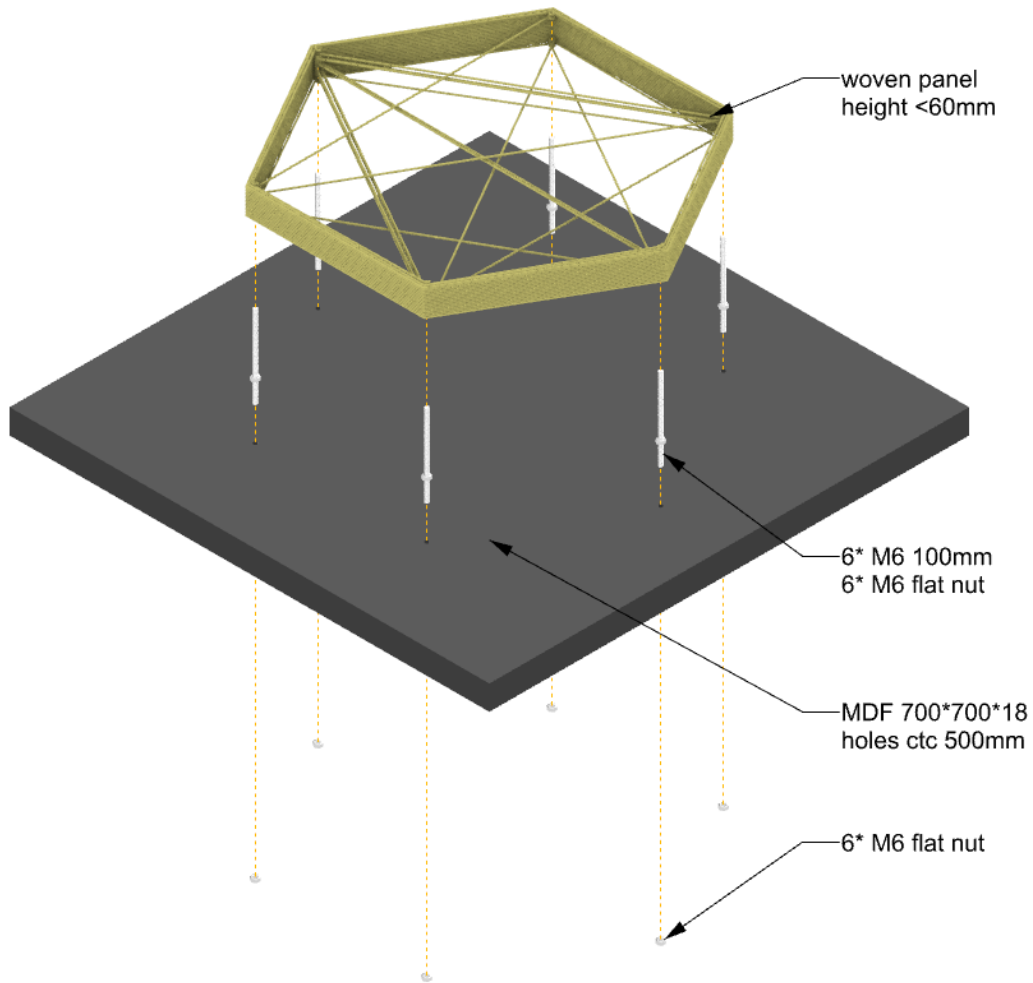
Isometric drawing of the mold arrangement for a hexagonal panel
